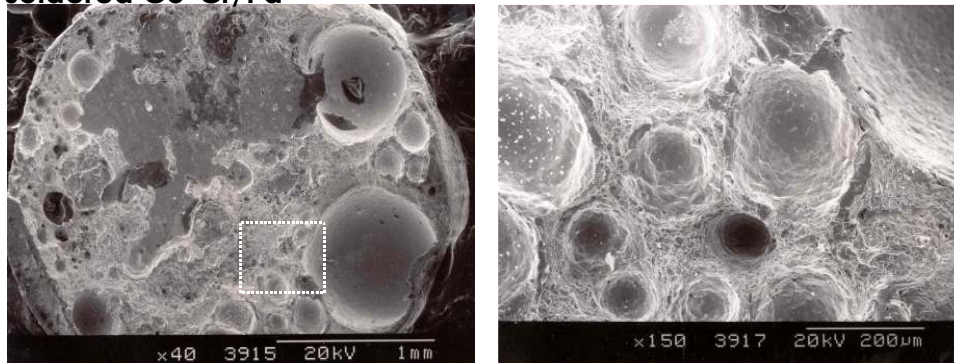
Left, low magnification SEM fractography of soldered Co-Cr/ Palladium specimen. Partially fusion of the specimen together with some large porosity. Right, Features of dimple fracture and some porosity are present.
